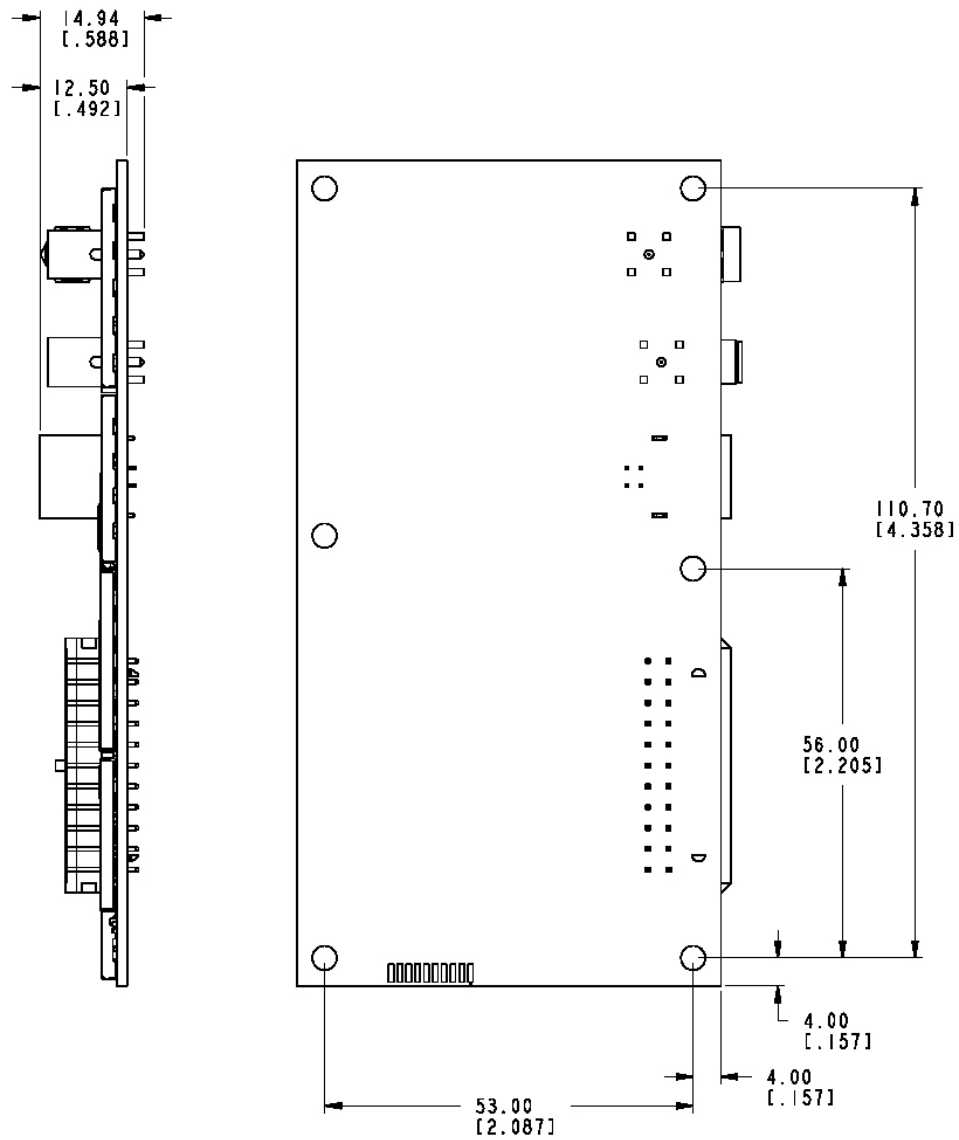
GSP-1720 Module Board Layout (Side/ Bottom Views)
